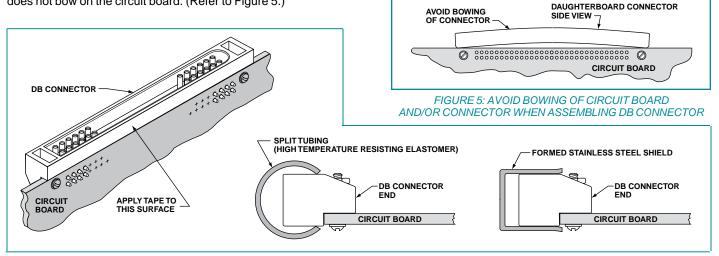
THREE TYPICAL MASKING APPLICATIONS FOR SOLDERING DB CONNECTORS
